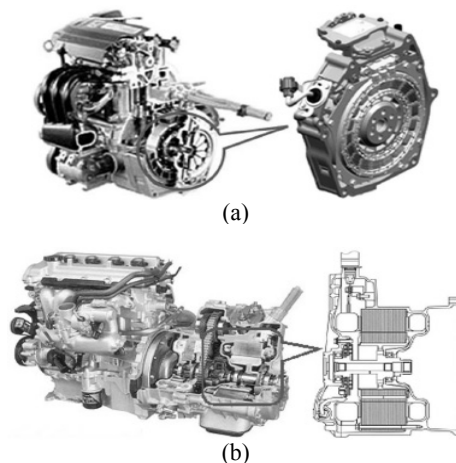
Industrial PM synchronous motor. (a) 10-kW motor of the Honda Insight. (b) 50-kW motor of the Toyota Prius [6].
